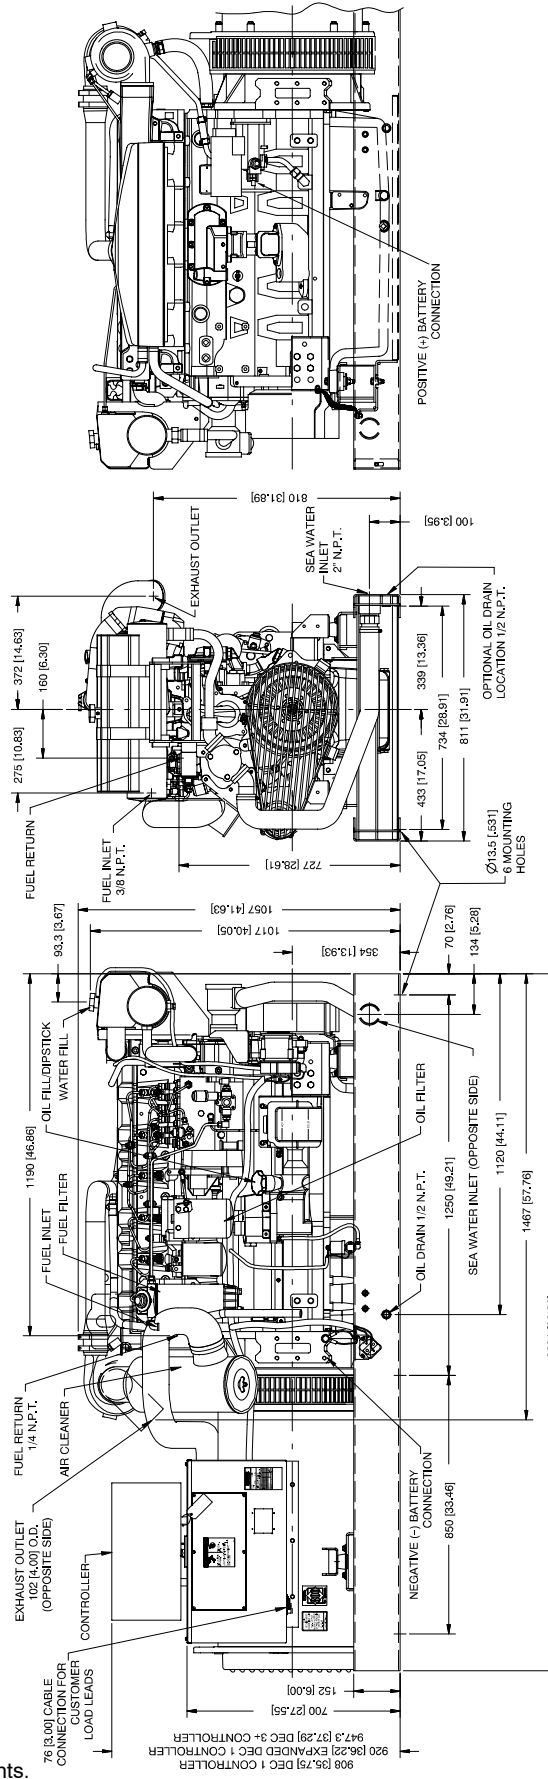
Dimension Drawing, 70/80EFOZ and 80/99EOZ with Sound Shield
